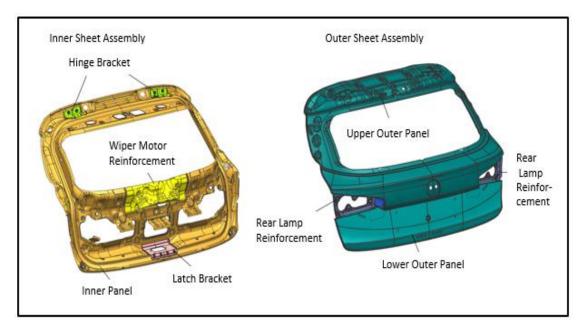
Existing door structures – inner and outer sheet assembly pictures
